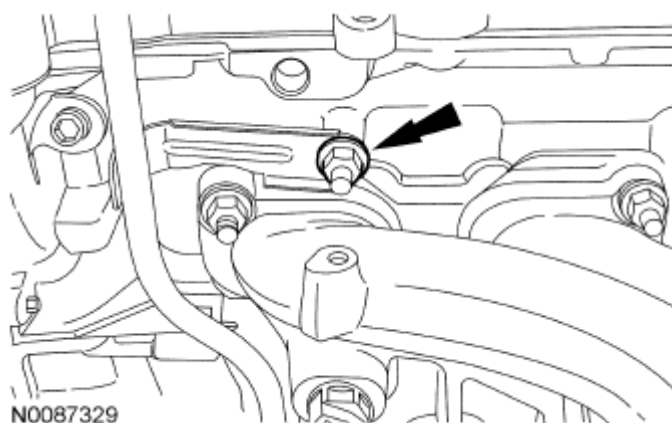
Identifying Oil Level Indicator & Tube With Stud Bolt
